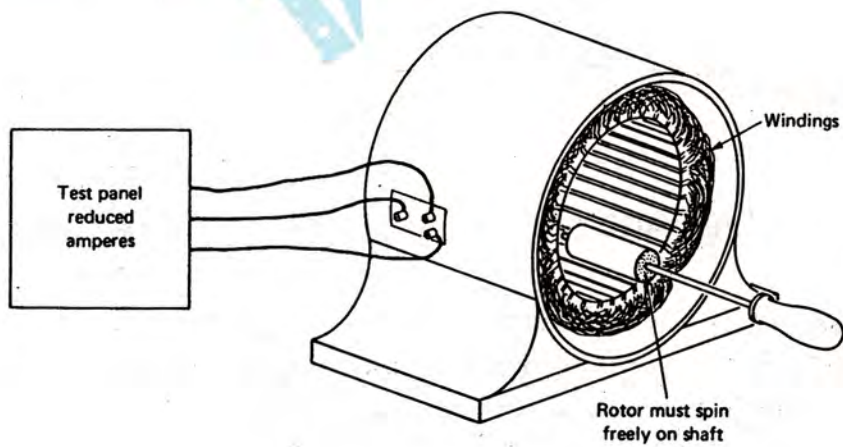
A test rotor used to find reversed coils or coil groups in stators.
